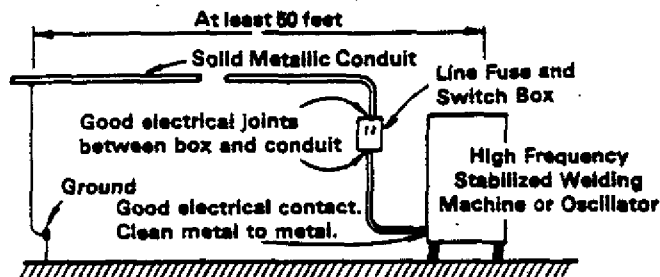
1. Power Service Installation H.F. Stabilized Arc Welding Machine
